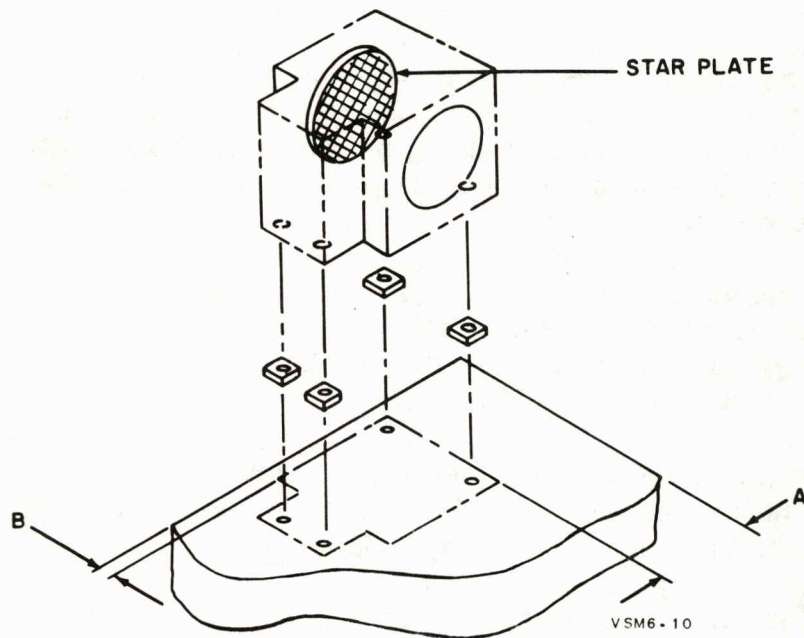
Starfield Generator Critical Mounting Dimensions
